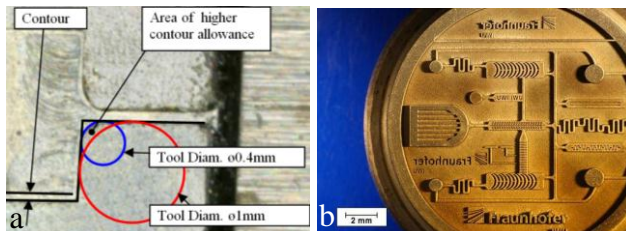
a) Machinable structural dimensions in relation to the tool diameter [3]; b) Embossing die with micro fluidic structures (silicon carbide)
